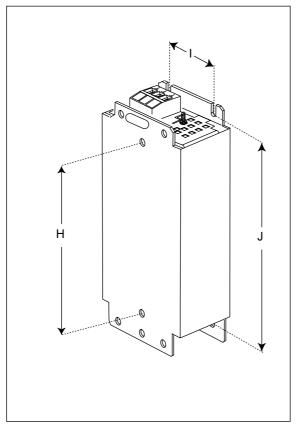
Mounting dimensions of line reactor, frame size FSA
